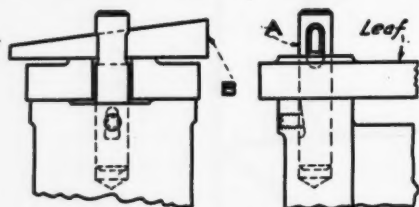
Wedge Pin Type of Jig Leaf Lock.
